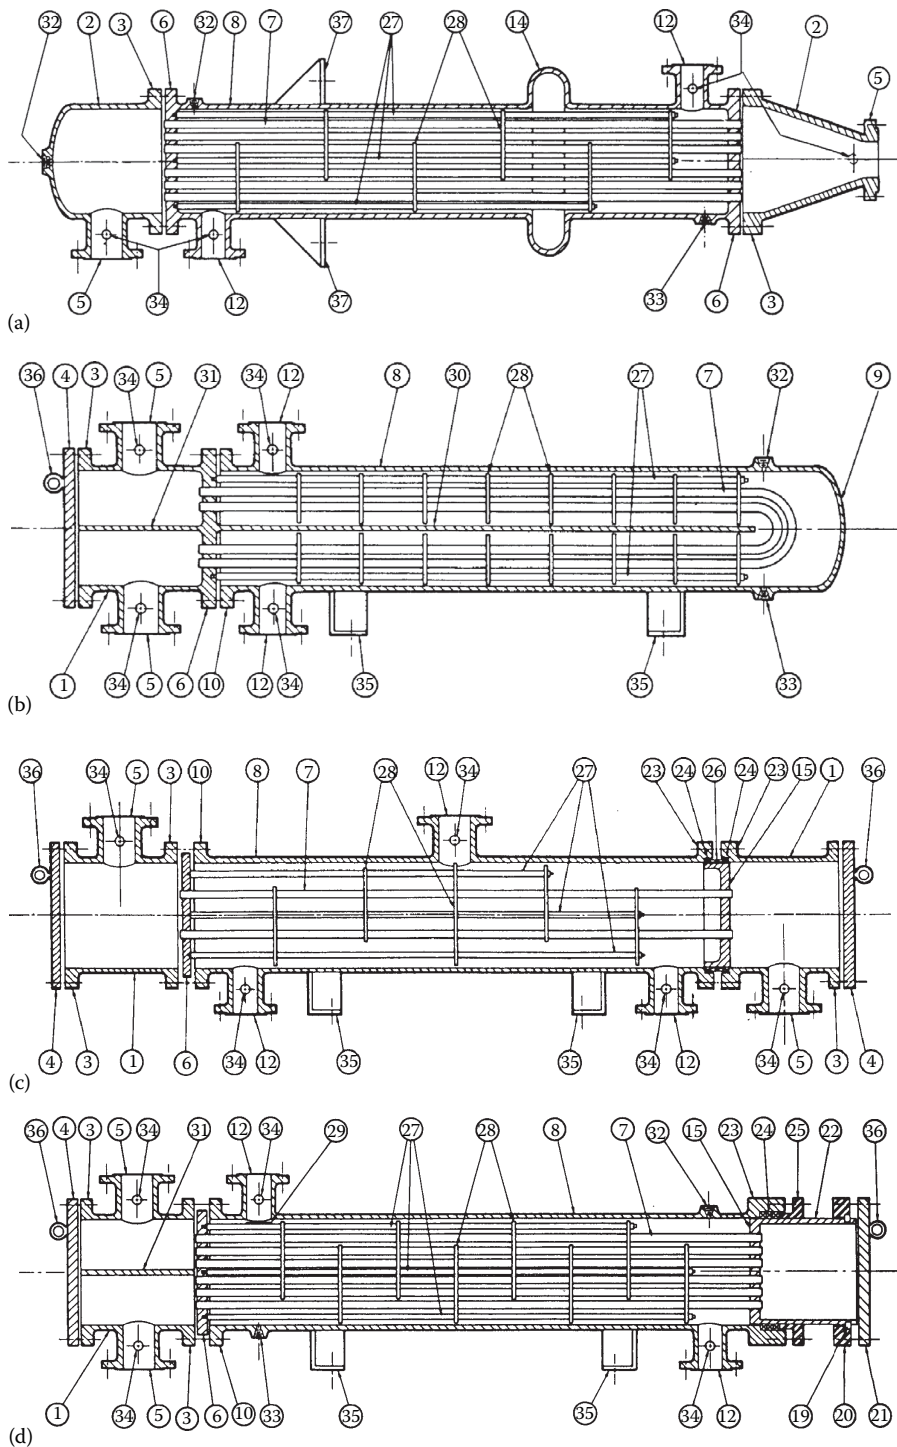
Heat exchanger types as per TEMA designation. (a) Fixed tubesheet heat exchanger, (b) U-tube heat exchanger, (c) divided flow—externally sealed floating tubesheet heat exchanger, (d) floating head—outside packed floating head heat exchanger.
